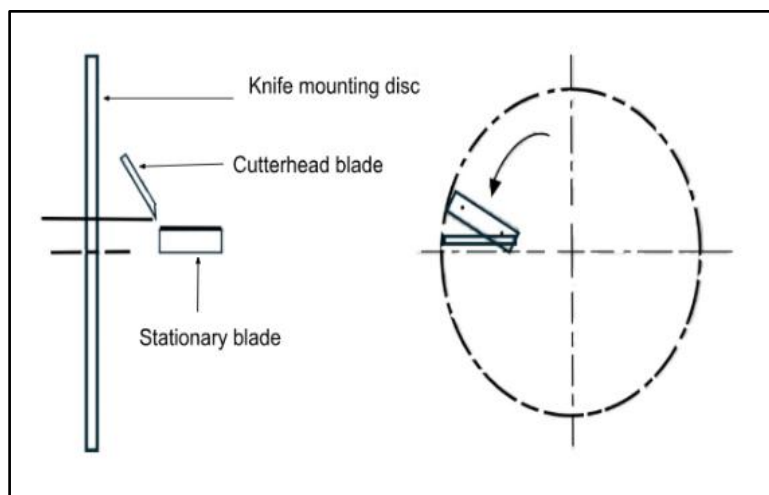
Flywheel cutterhead (AMTEC-UPLB, 2004)
